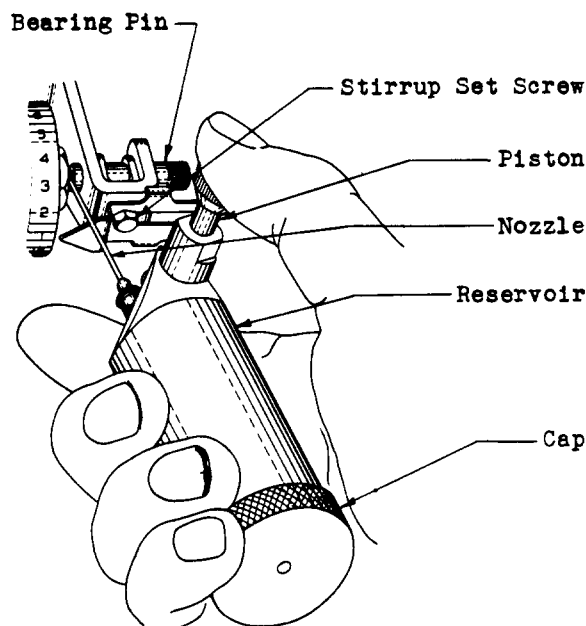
Method of Lubricating Cam Shaft Bearing at the Stirrup End with the No. 353-B Lubricator
